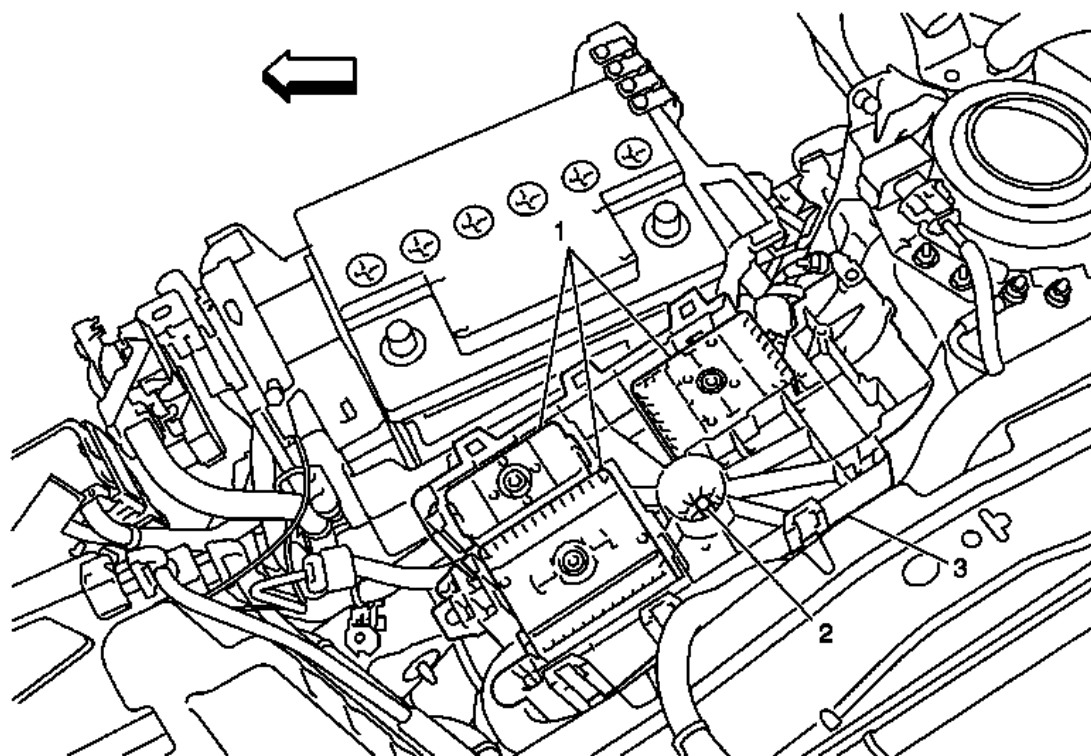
Front Compartment Fuse Block Housing, Nut & Plugs
